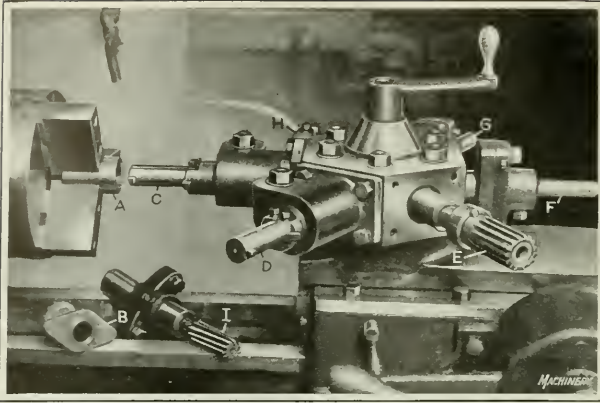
Equipment for machining Bronze Bushings for Front and Rear Camshaft Bearings
